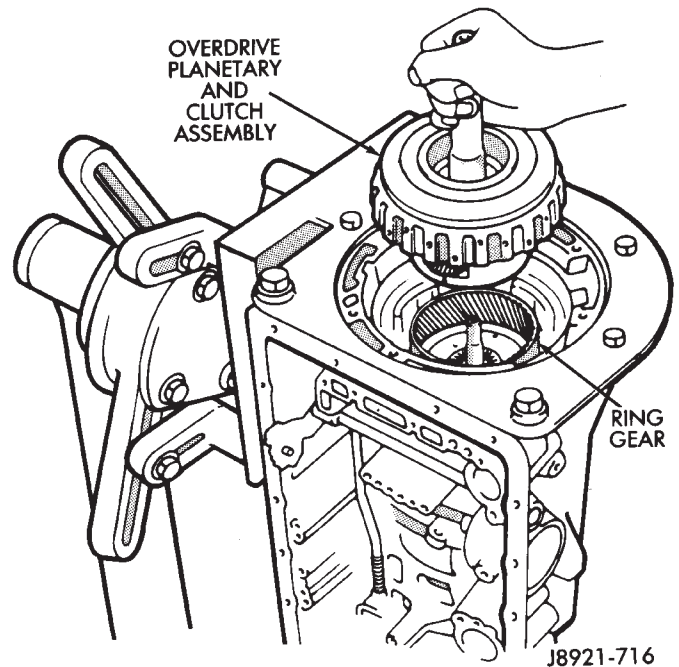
Installing Overdrive Planetary And Clutch Assembly
